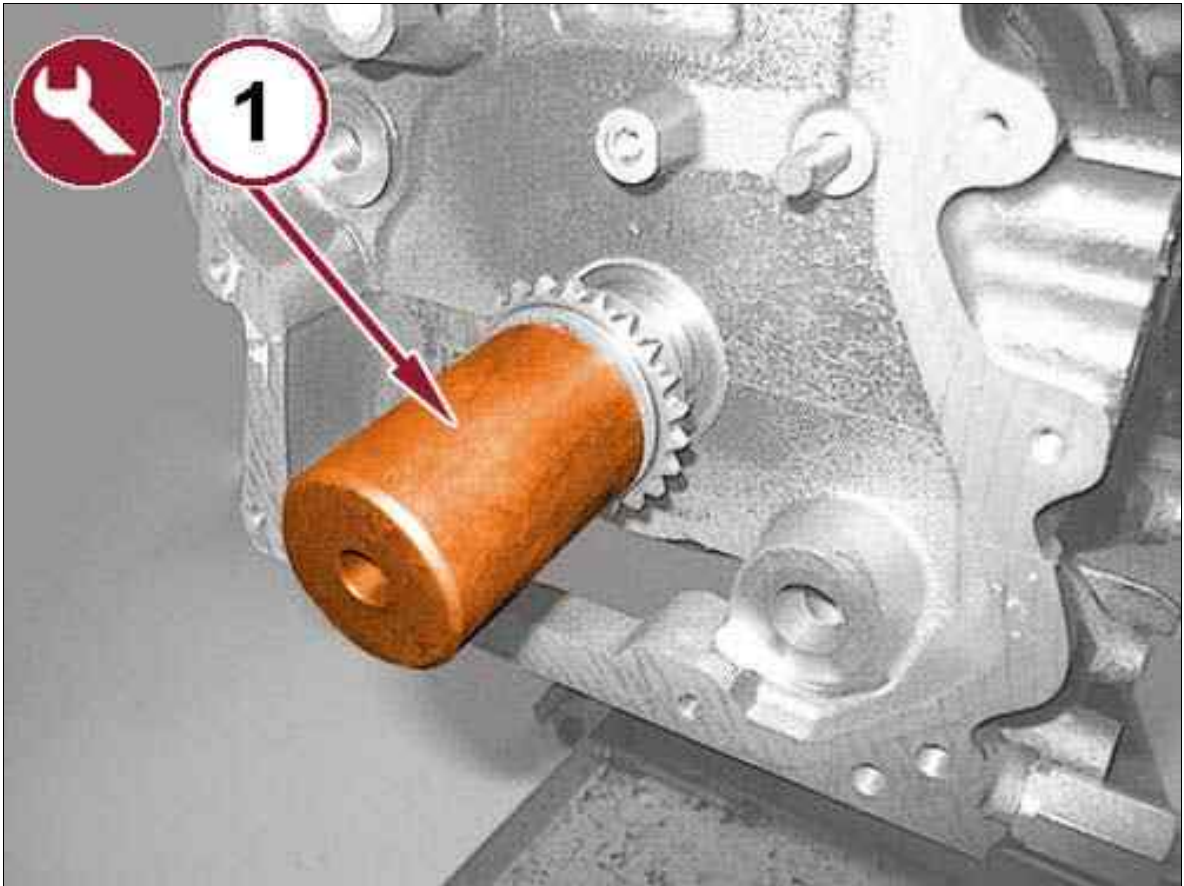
Installing Timing Chain Drive Gear Ensuring Pin Is Aligned With Groove
